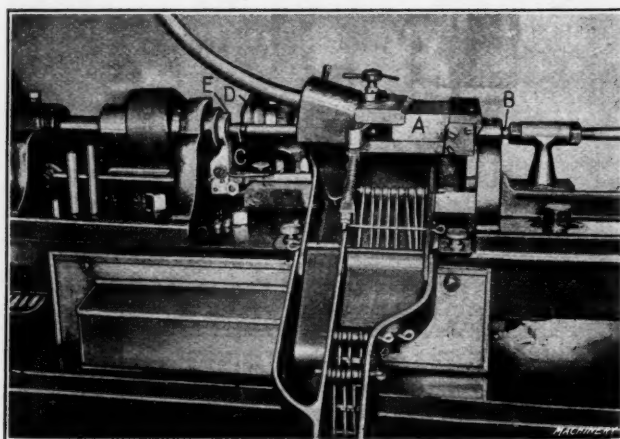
Close View of One of the Automatic Trimming Machines shown in Fig. 8
